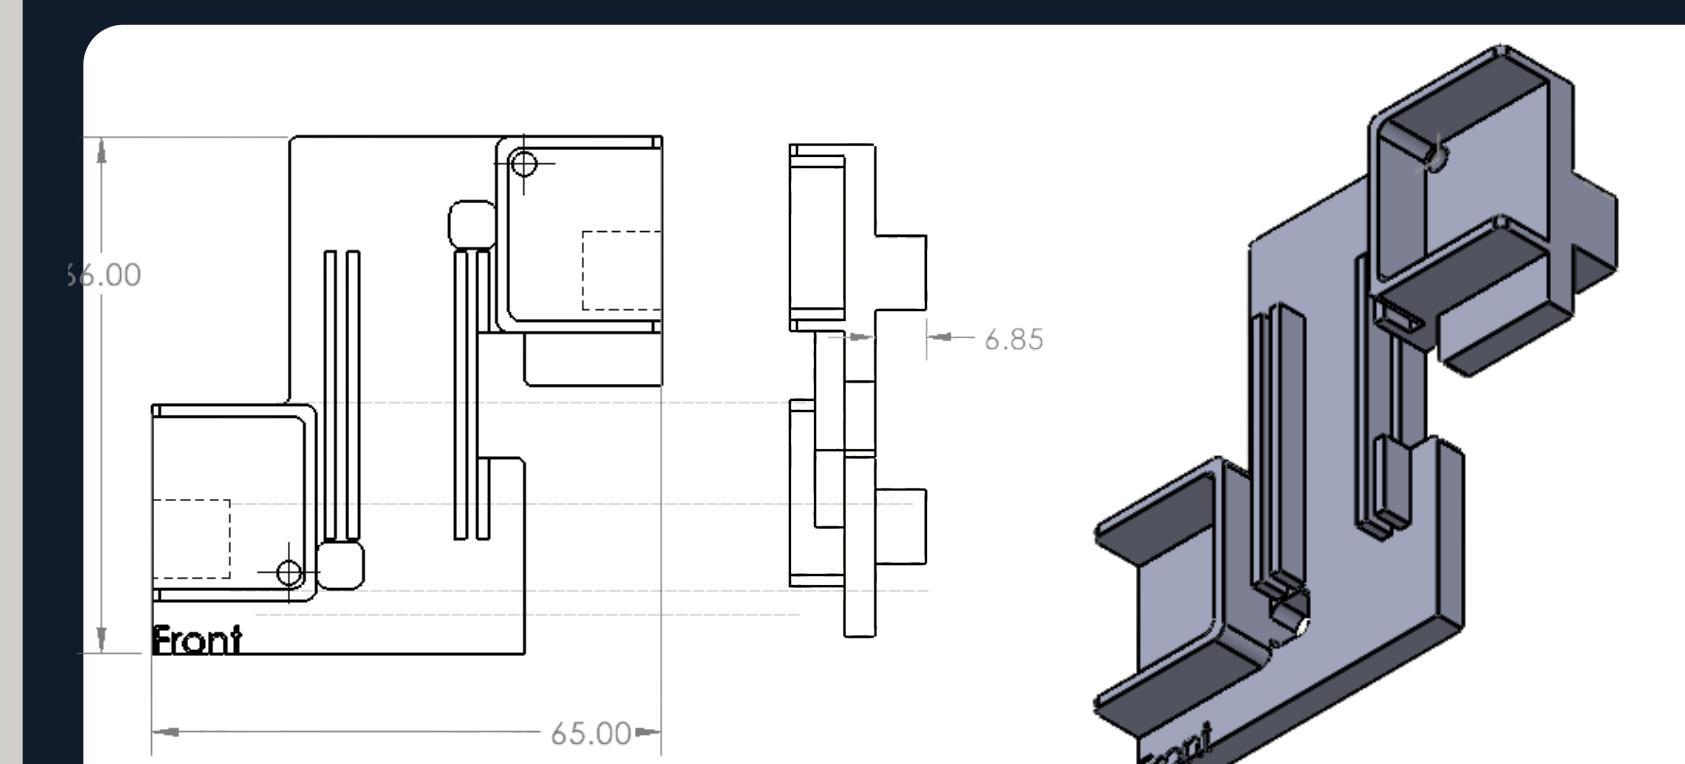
Chassis CAD. Technical drawings detailing the dimensional specifications of the mechanical assembly.
